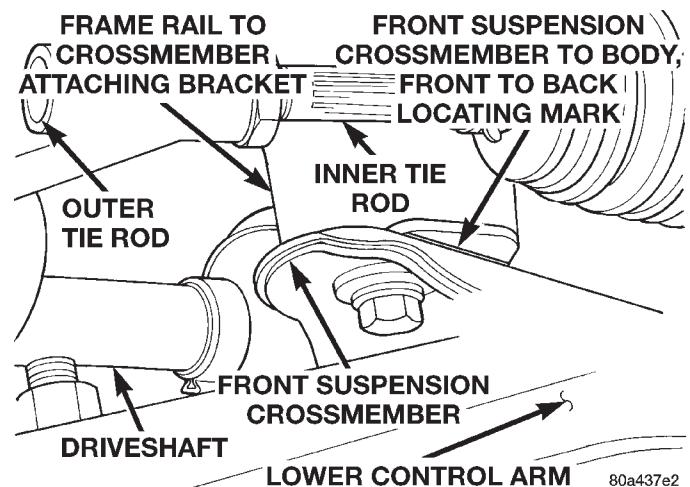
Front Suspension Crossmember Front To Back Locating Mark (Left Side Rear)
